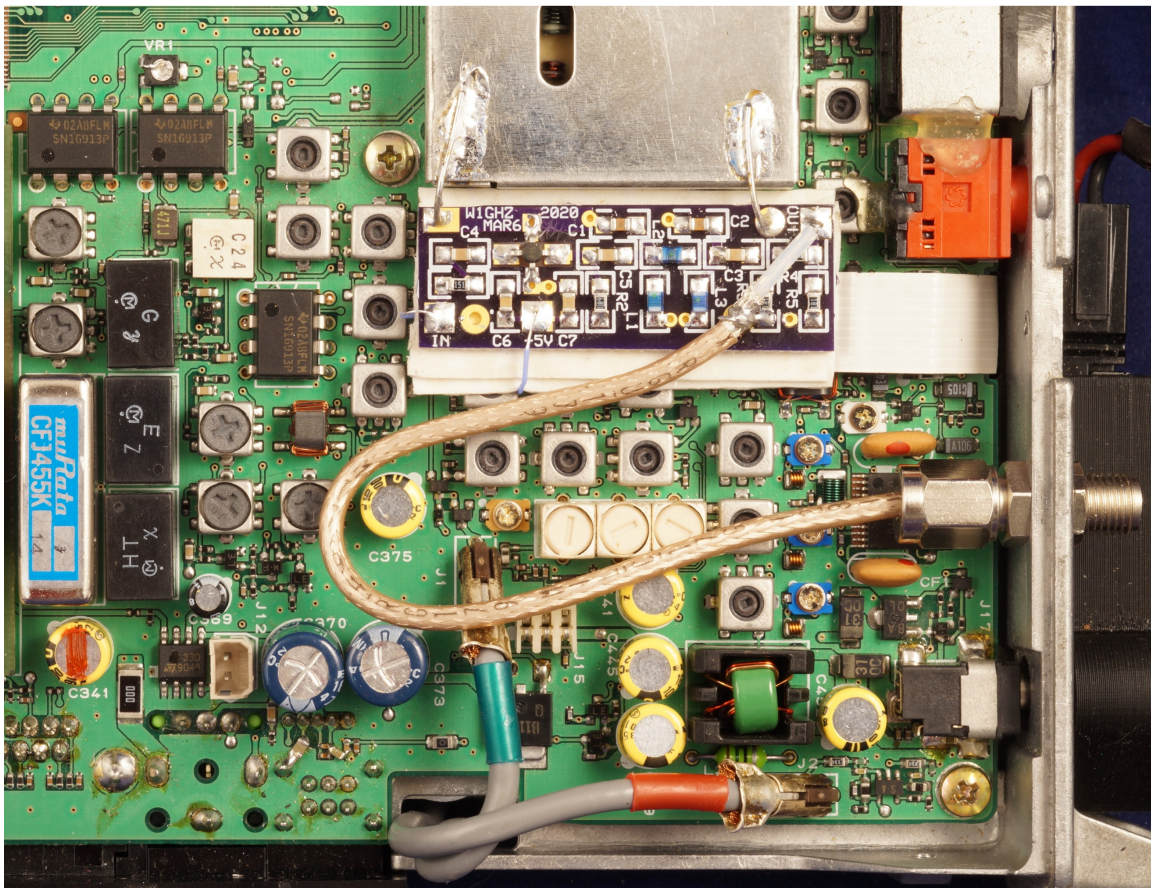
Low-cost surface-mount version Panadapter board installed in FT-817
